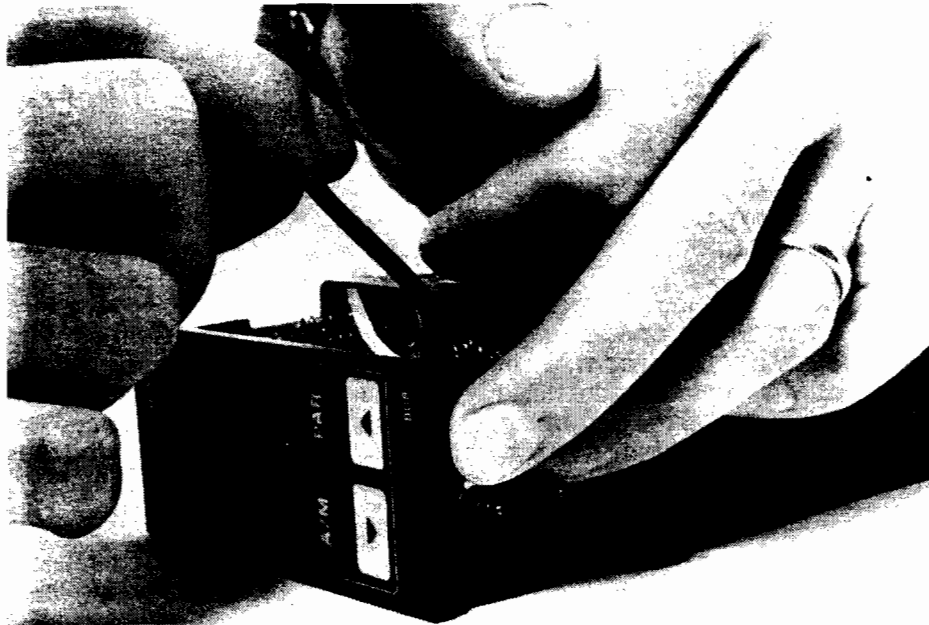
Carefully peel off a few inches of the backing paper from the adhesive backing of the strip gasket, and starting underneath the jacking screw, apply the gasket around the inner shoulder of the fascia plate. Do not stretch the neoprene.
